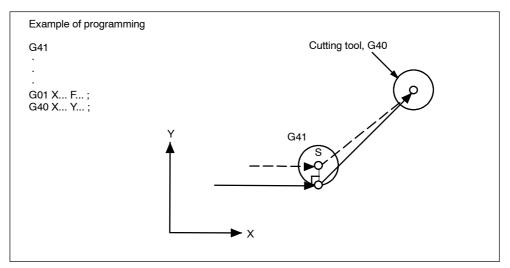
Canceling the offset mode at inside corner (straight-line to straight-line)
